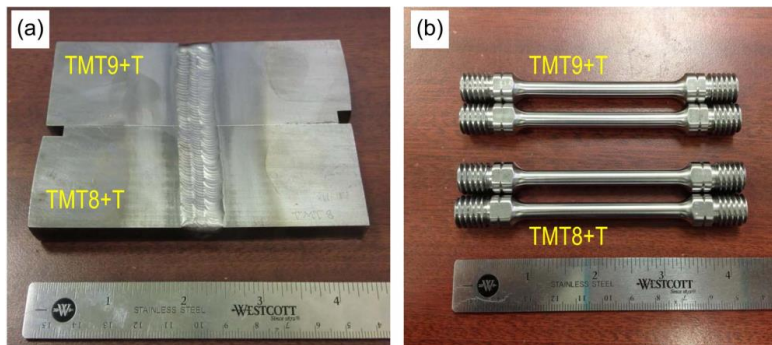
(a) Appearance of the TMT + tempered plates after GTAW on a single-V groove, and (b) the tensile creep specimens machined from the welded plates after applying PWHT.
